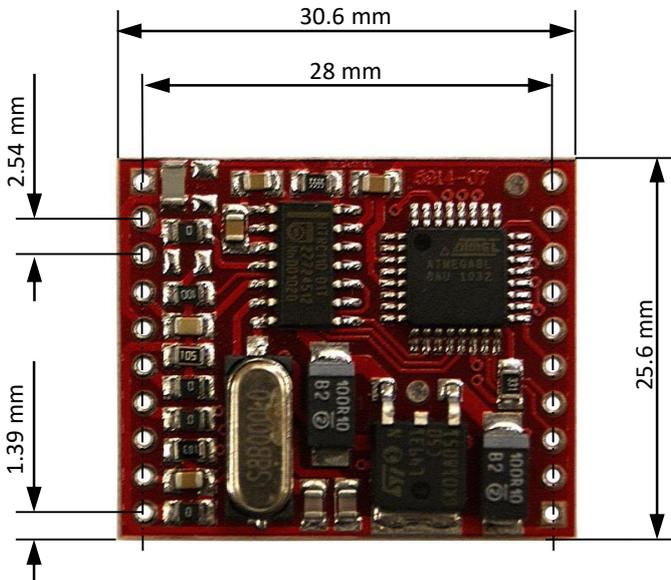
Dimensional Drawing of OEM Module, view onto upper side with RFID reader IC
